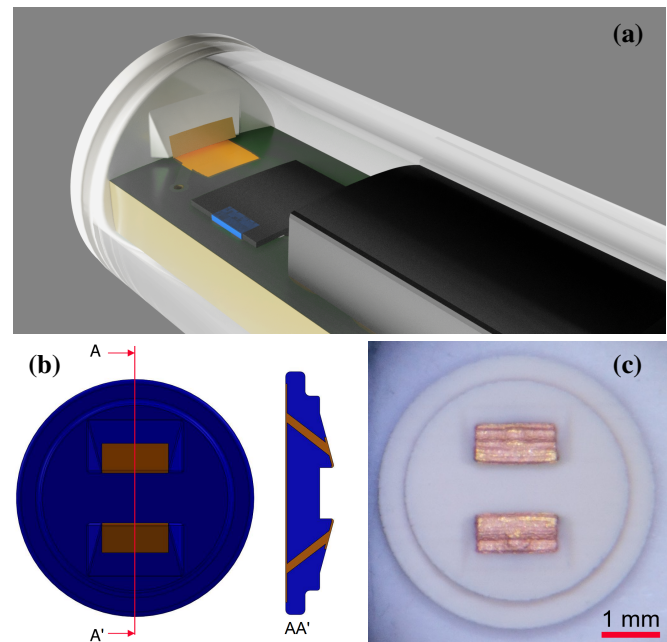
(a) Detailed illustration showing the attachment of the NeuroStone™ electrode to the PCB. (b) CAD design of the electrode illustrating the metallic via for connecting the two sides and the groove for inserting the PCB in the cross-sectional view. (c) Picture of a printed electrode highlighting the solder pads on the inner side of the ceramic base and the circular groove for fitting to the glass tube.
